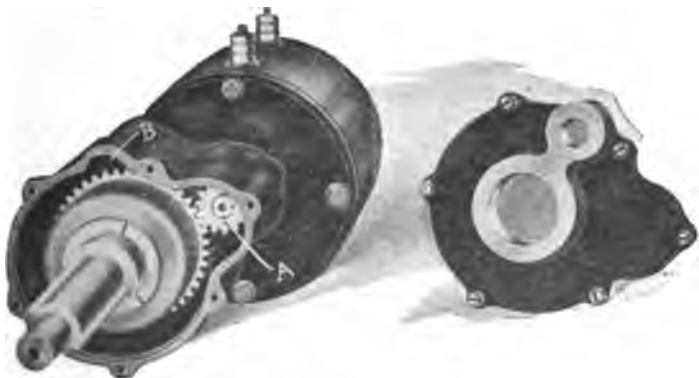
End view of 1914 Wagner starting motor and reduction gearing
